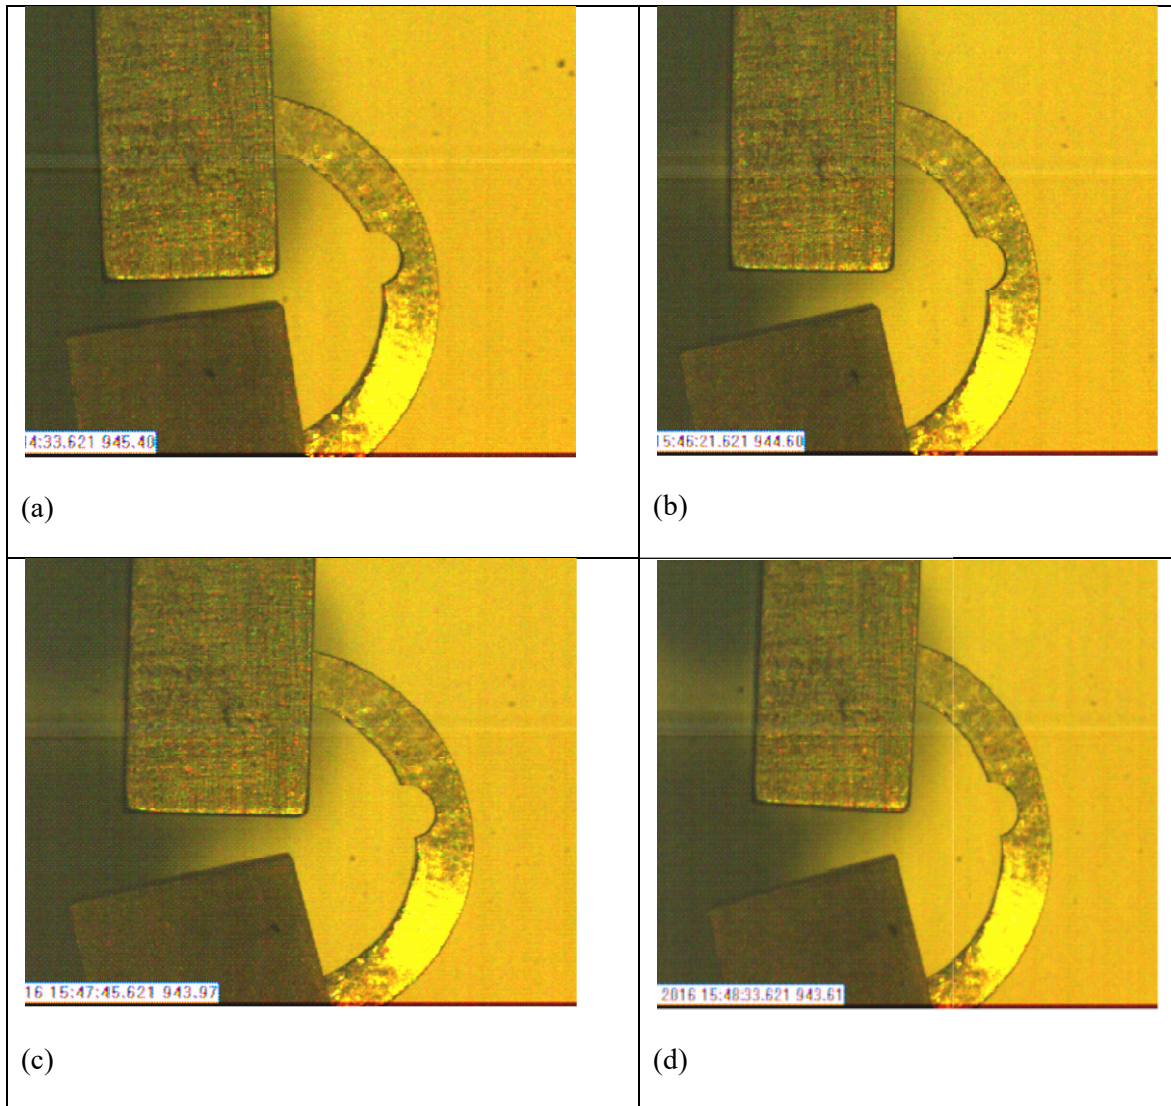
Several frames from the high-speed recording of the fracture toughness test of a ~400 micron nickel-aluminum powder (swaged with 18.8 mm core) ring with the loading fixtures attached at the top and bottom of the specimen: (a) frame captured from the beginning of the test; (b) frame captured at the onset of fracture; (c) frame captured just before complete fracture and failure; (d) frame showing the end of the test.
